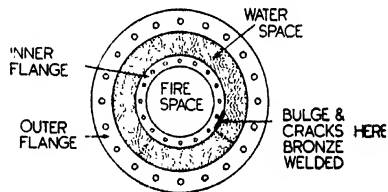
is a sketch of a fabricated steel gate-post. For repair work on steel, bronze welding is often used, and Fig. 14 shows a steel heating boiler repaired by this means.
